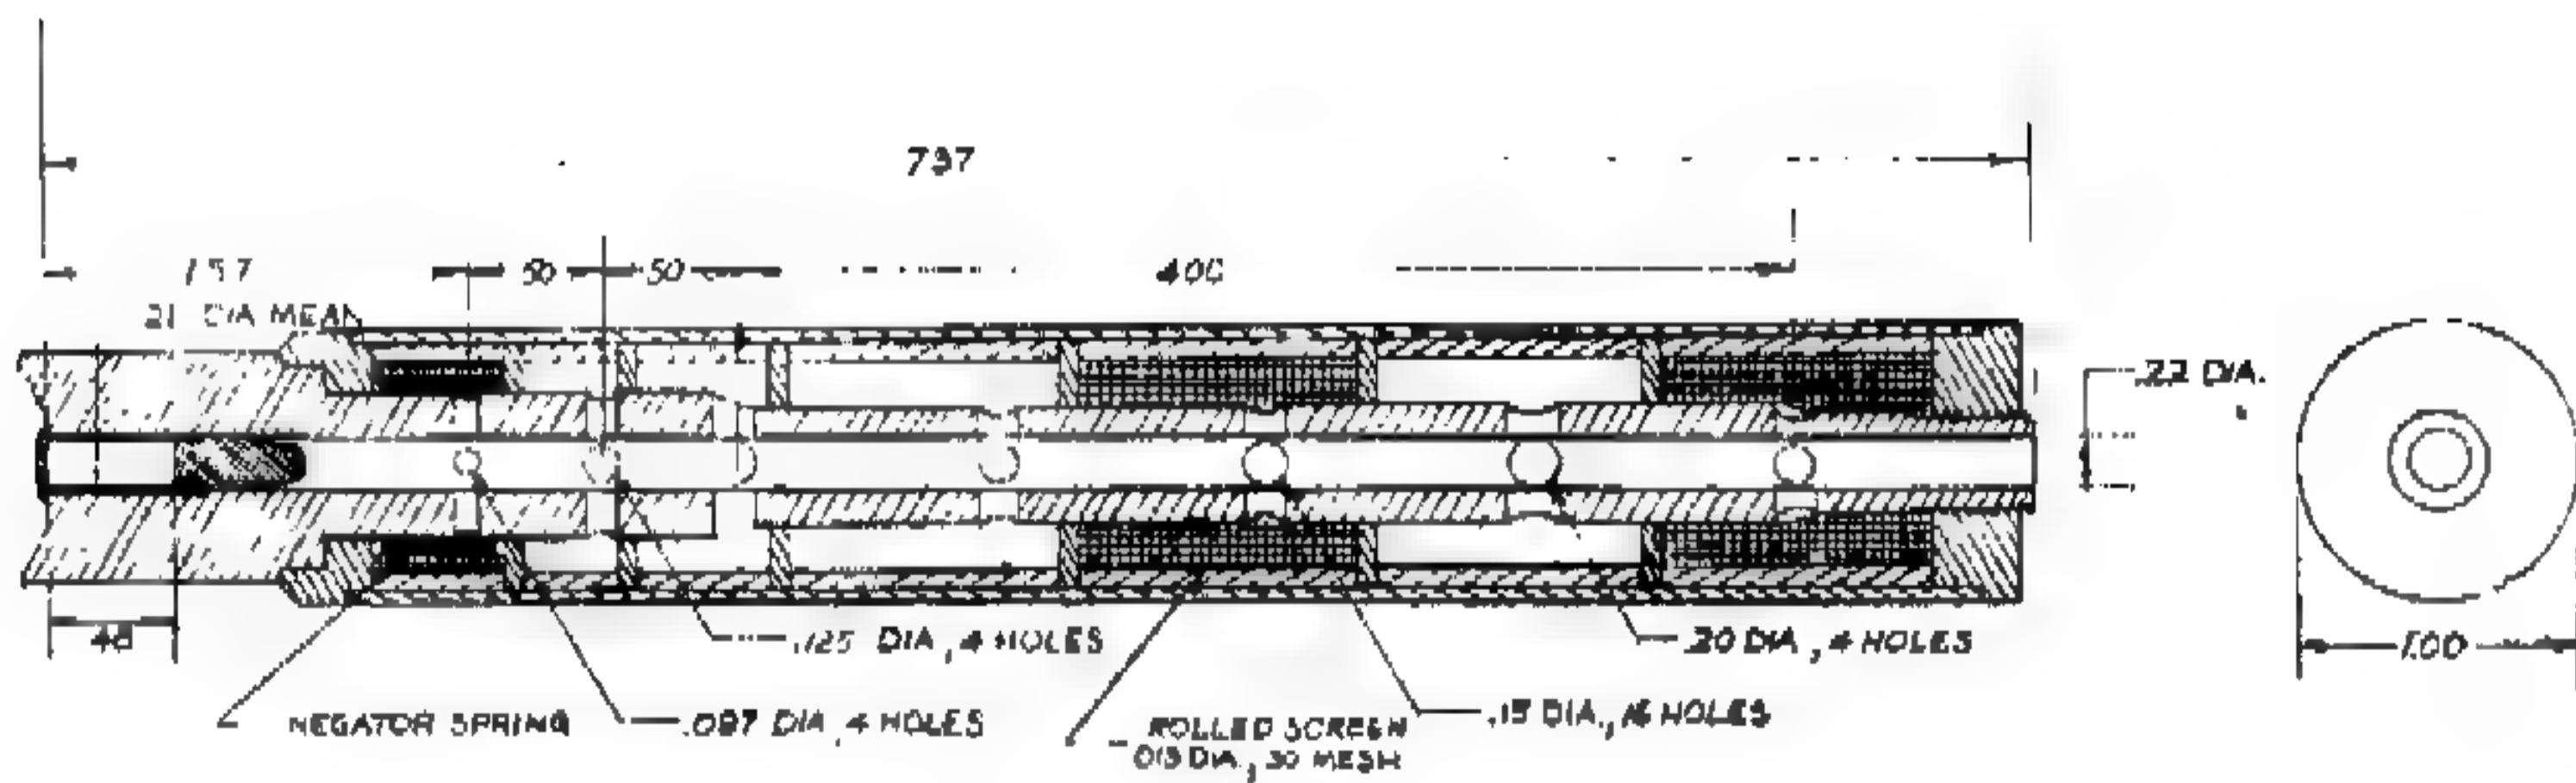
Cross section, Caliber .22 Silenced AAI Experimental Test Fixture
